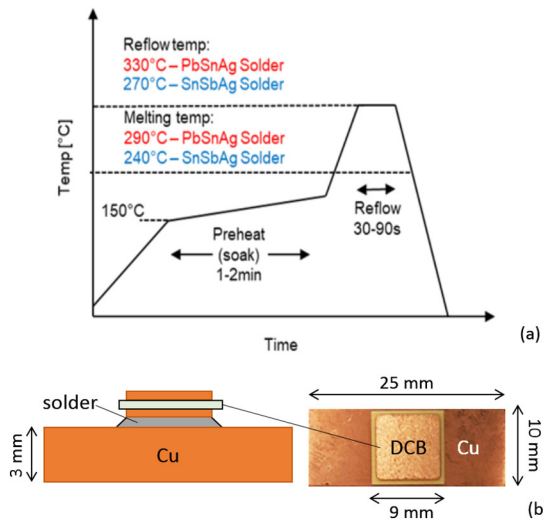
Schematic reflow profile for PbSnAg and SnSbAg Solder (a) cross section and top view of DCB/solder/Cu model joints (b).
